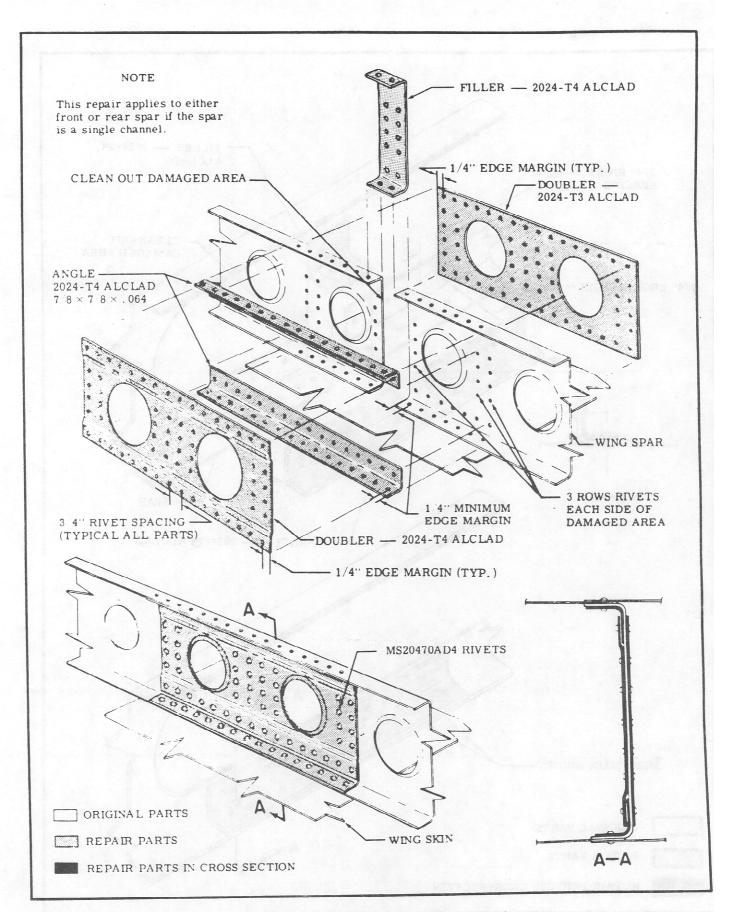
Wing Spar Repair (Sheet 2 of 3)
